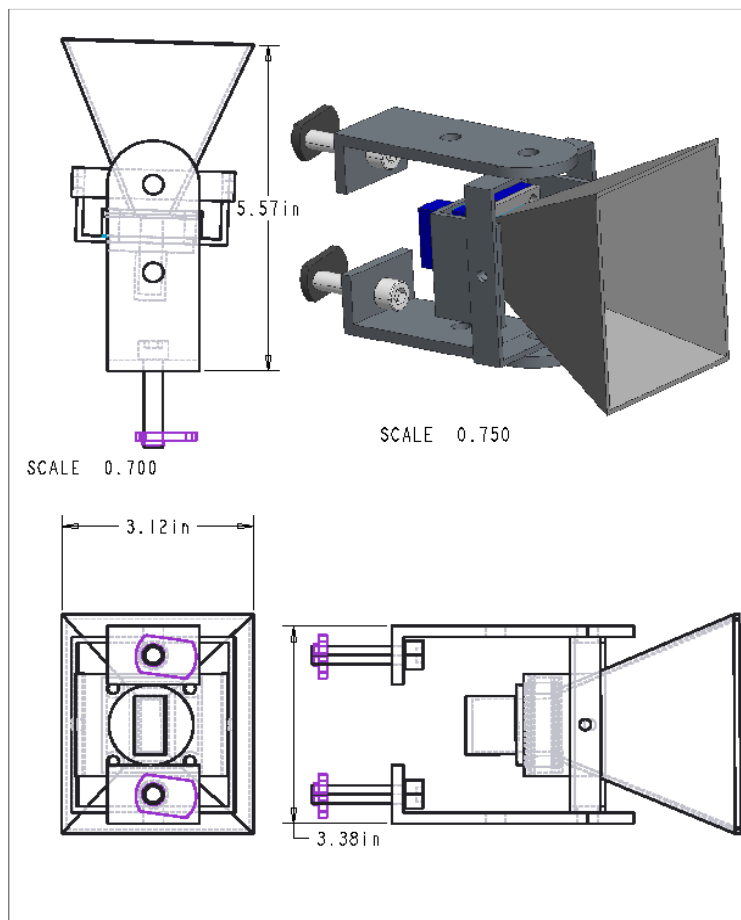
Design H-1, 3D and Dimensioned Drawings in Inches
